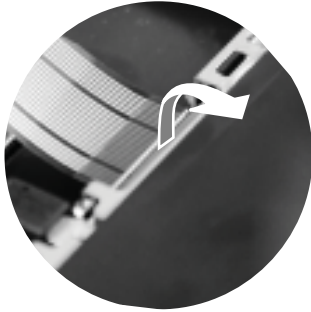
Reinstall the keyboard assembly (M830; 4 of 7)
